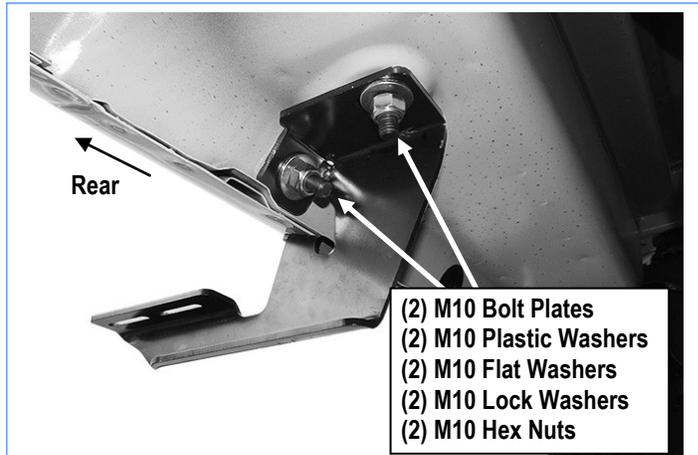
Driver Front Mounting Bracket (DFM) Installation
